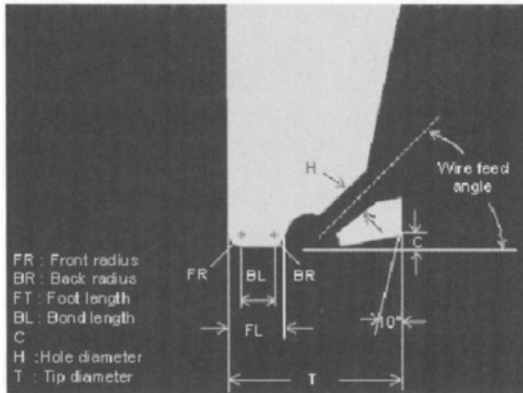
Cross sectional view of a V-notch wedge identifying the standard dimensions [Adopted from product catalog: Gaiser Tool]
